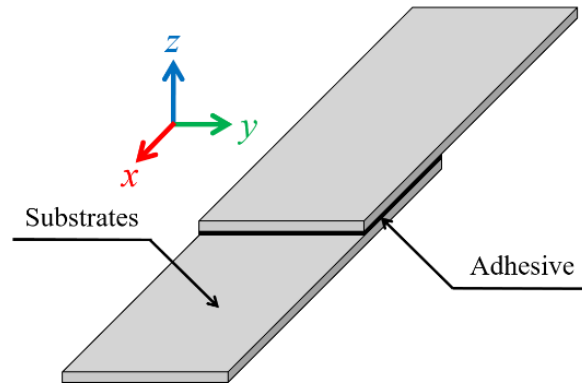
Single-lap bonded assembly (ASTM D4896).
